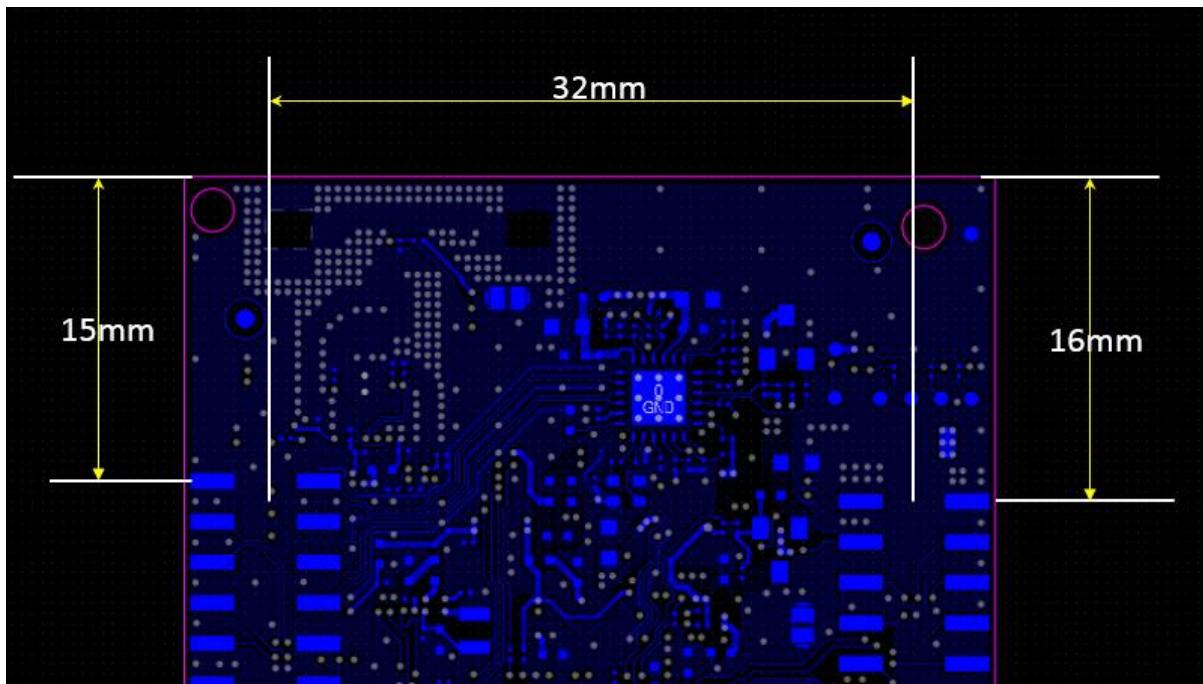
LS10 Top View - Mechanical Dimension 3
